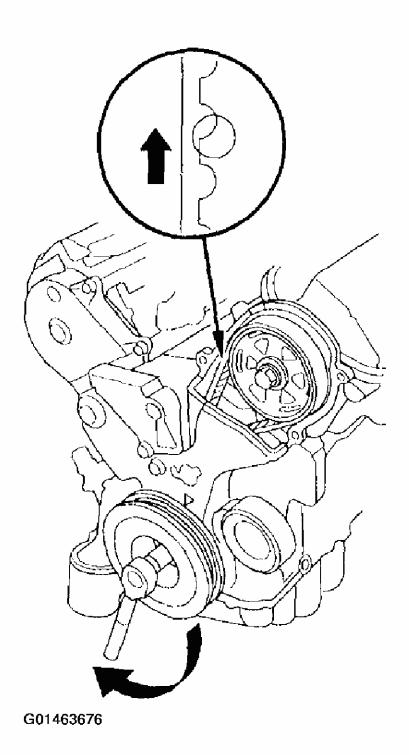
Inspecting The Timing Belt For Cracks & Oil Or Coolant Soaking Courtesy of AMERICAN HONDA MOTOR CO., INC.
